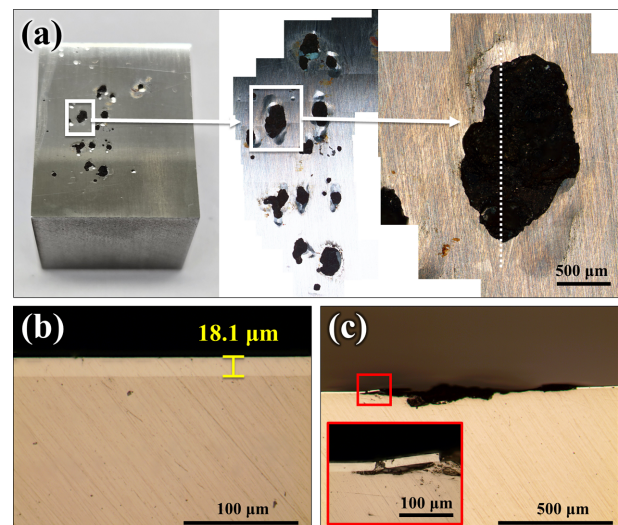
Surface and cross-sectional observations of coating layer and corrosion pit of the cylinder tube
